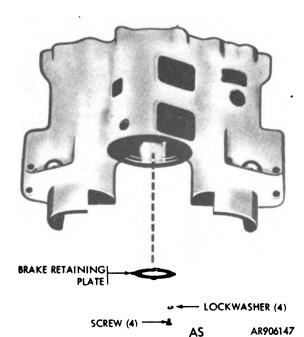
Traversing gearbox disassembly or assembly (14 of 15).
